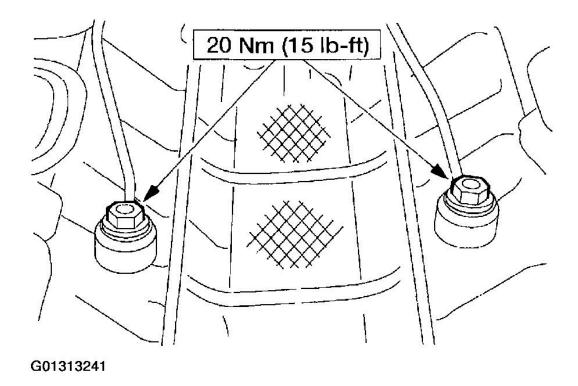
Installing Knock Sensors Courtesy of FORD MOTOR CO.
